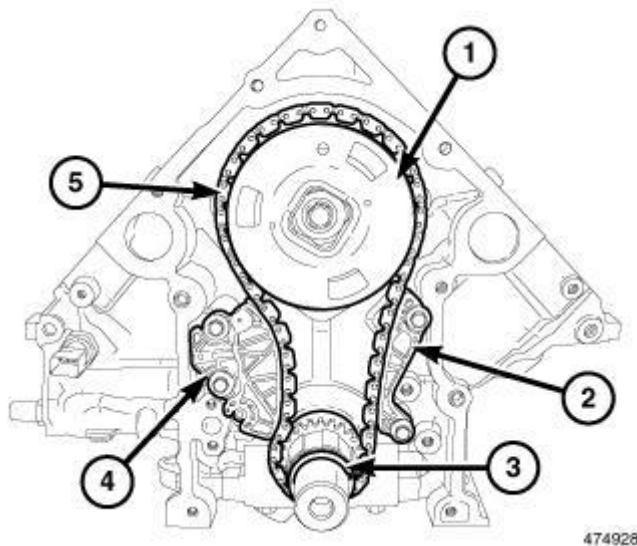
Timing Chain, Sprockets, Timing Chain Tensioner & Guide
